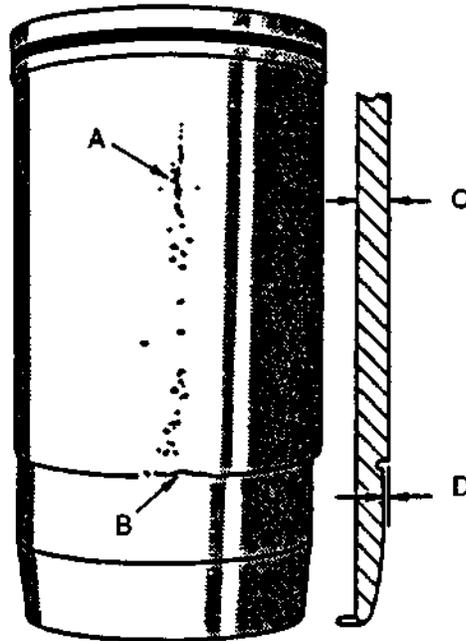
Inspecting Cylinder Liner Pitting
